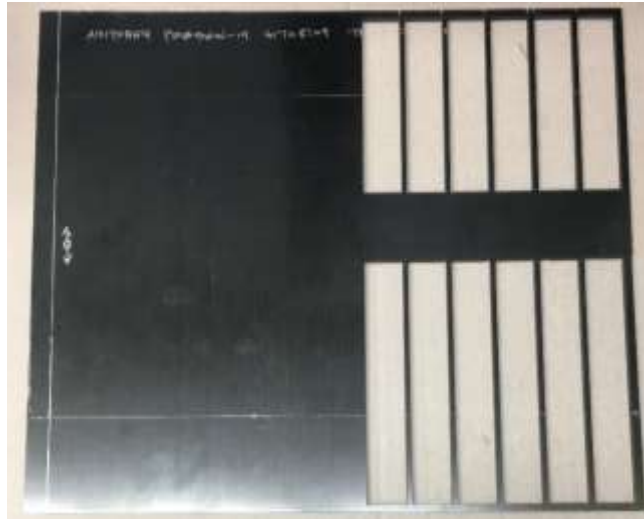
ENF and DCB manufactured boards showing test coupons cut from the original panel
